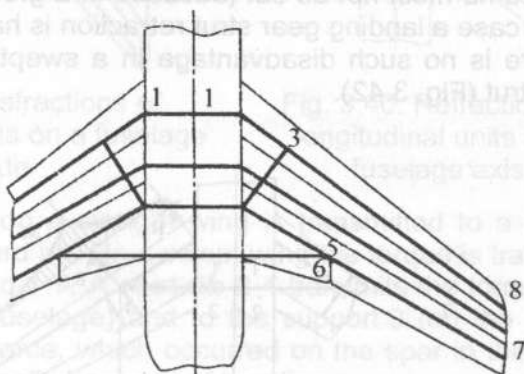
Torsion-box swept wing with an external bracing strut
